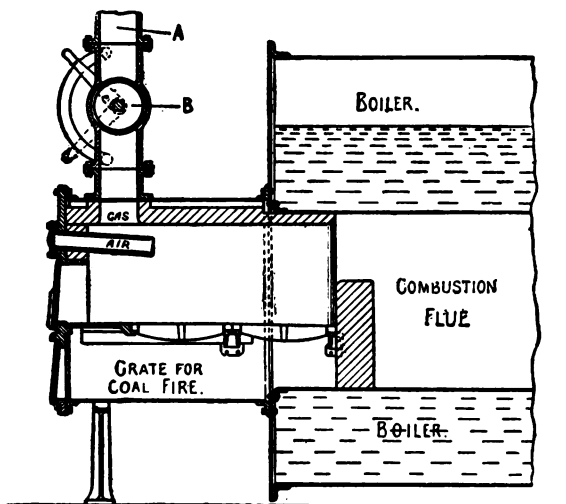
Sketch Showing Section of Arrangement for Utilising Blast-furnace Gas for Steam Raising.
